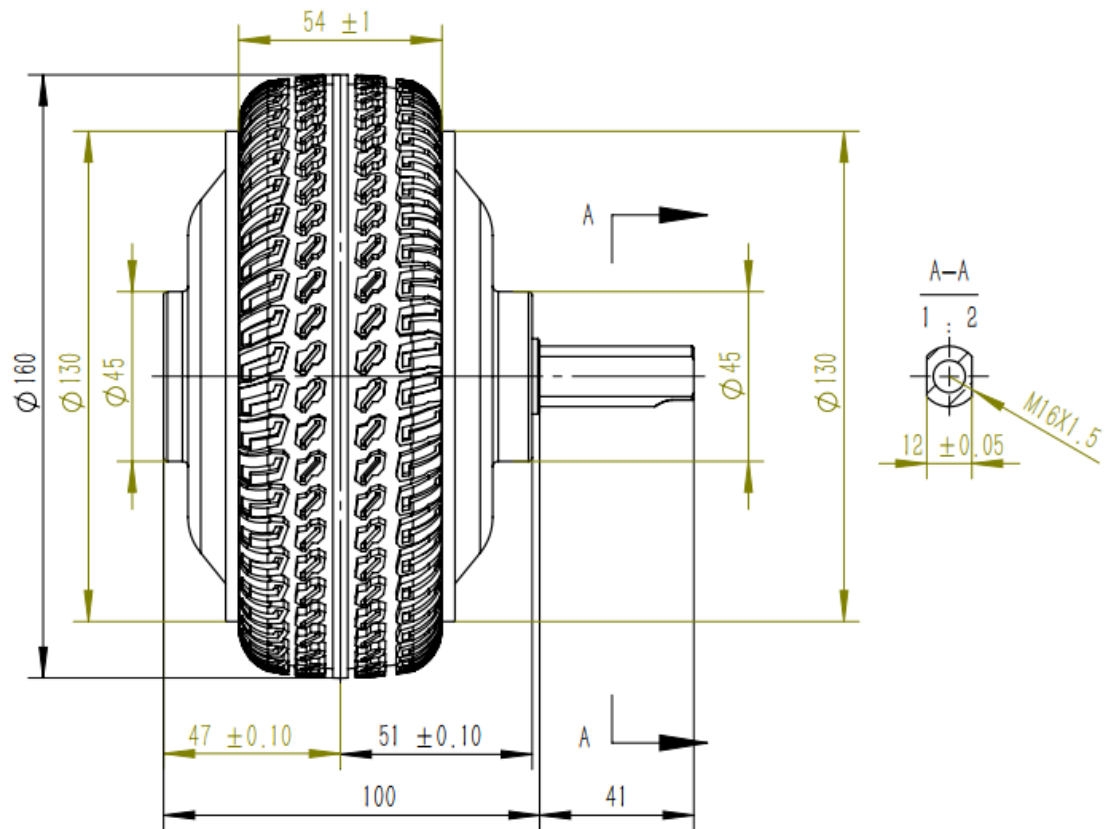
6 inch 13Nm/15Nm rubber-clad tires (without brakes) hub motor installation size
